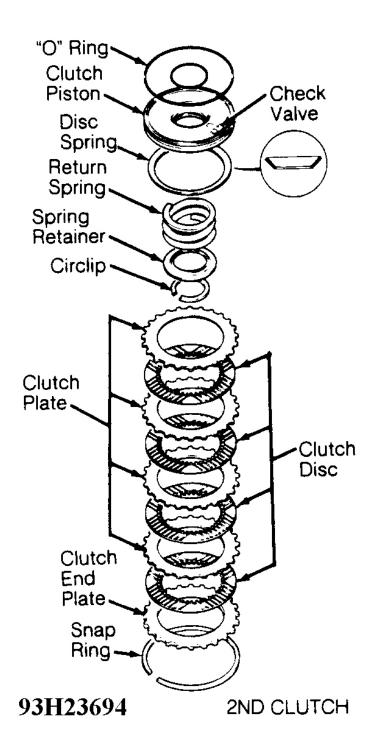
Exploded View Of 2nd-4th Clutch Assembly (1 of 2) Courtesy of AMERICAN HONDA MOTOR CO., INC.
